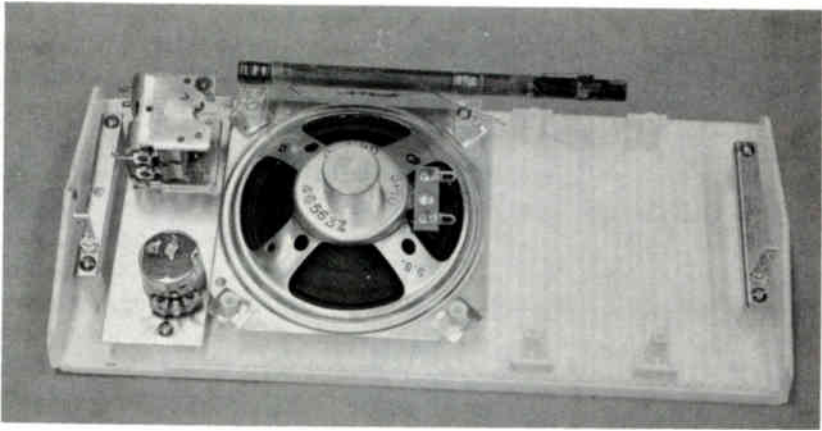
Rear view of front panel with all parts, except the circuit board, mounted in place.
